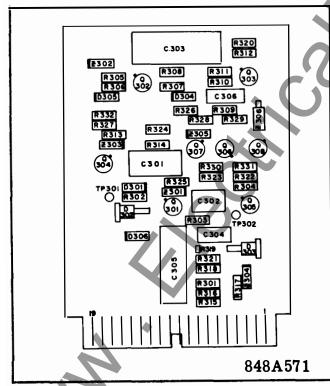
Component Location on Output Printed Circuit Board for Type SKBU Relay.
